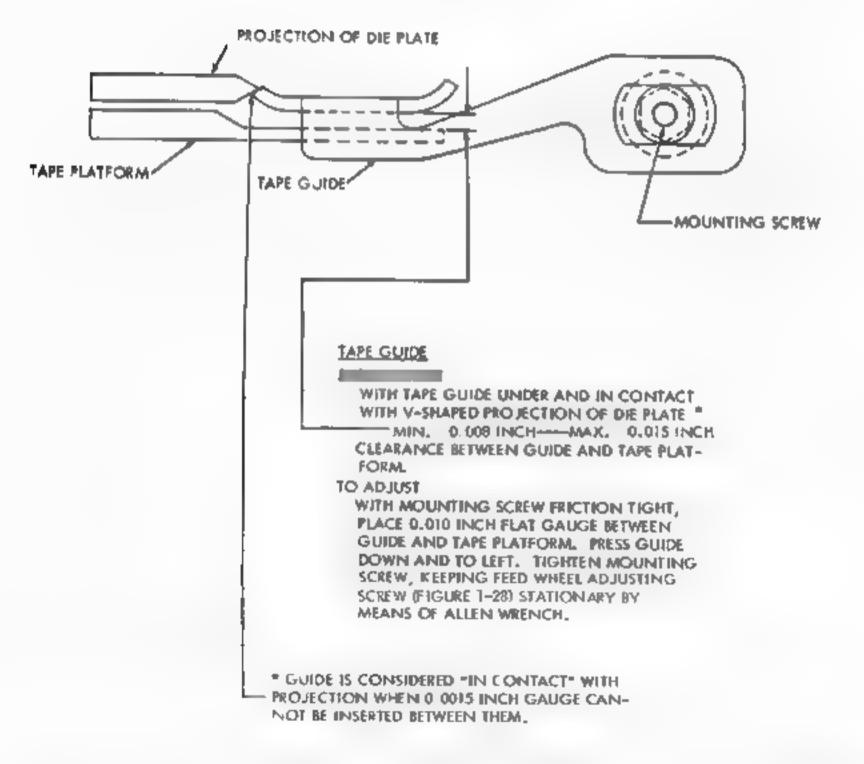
FEED WHEEL AND TAPE GUIDE
